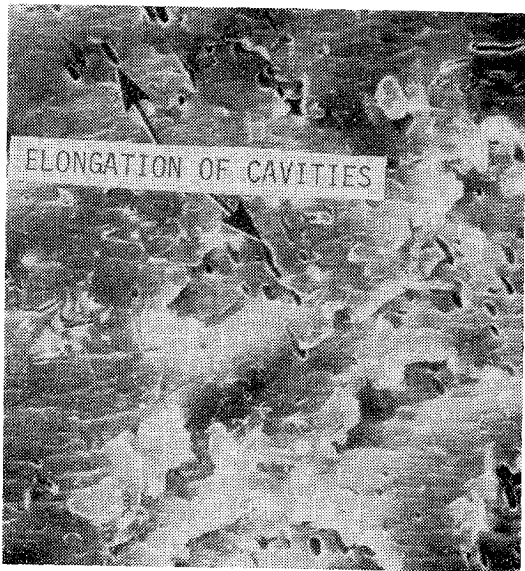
Photomicrograph of "early" fracture surface (skin side), group A, specimen No. 1.
